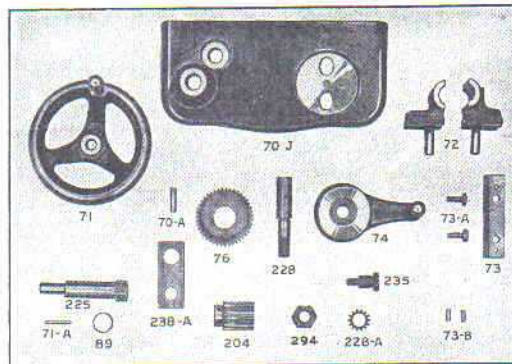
Apron Parts for 8-inch Junior and 9-inch Toolmaker South Bend Lathes.
